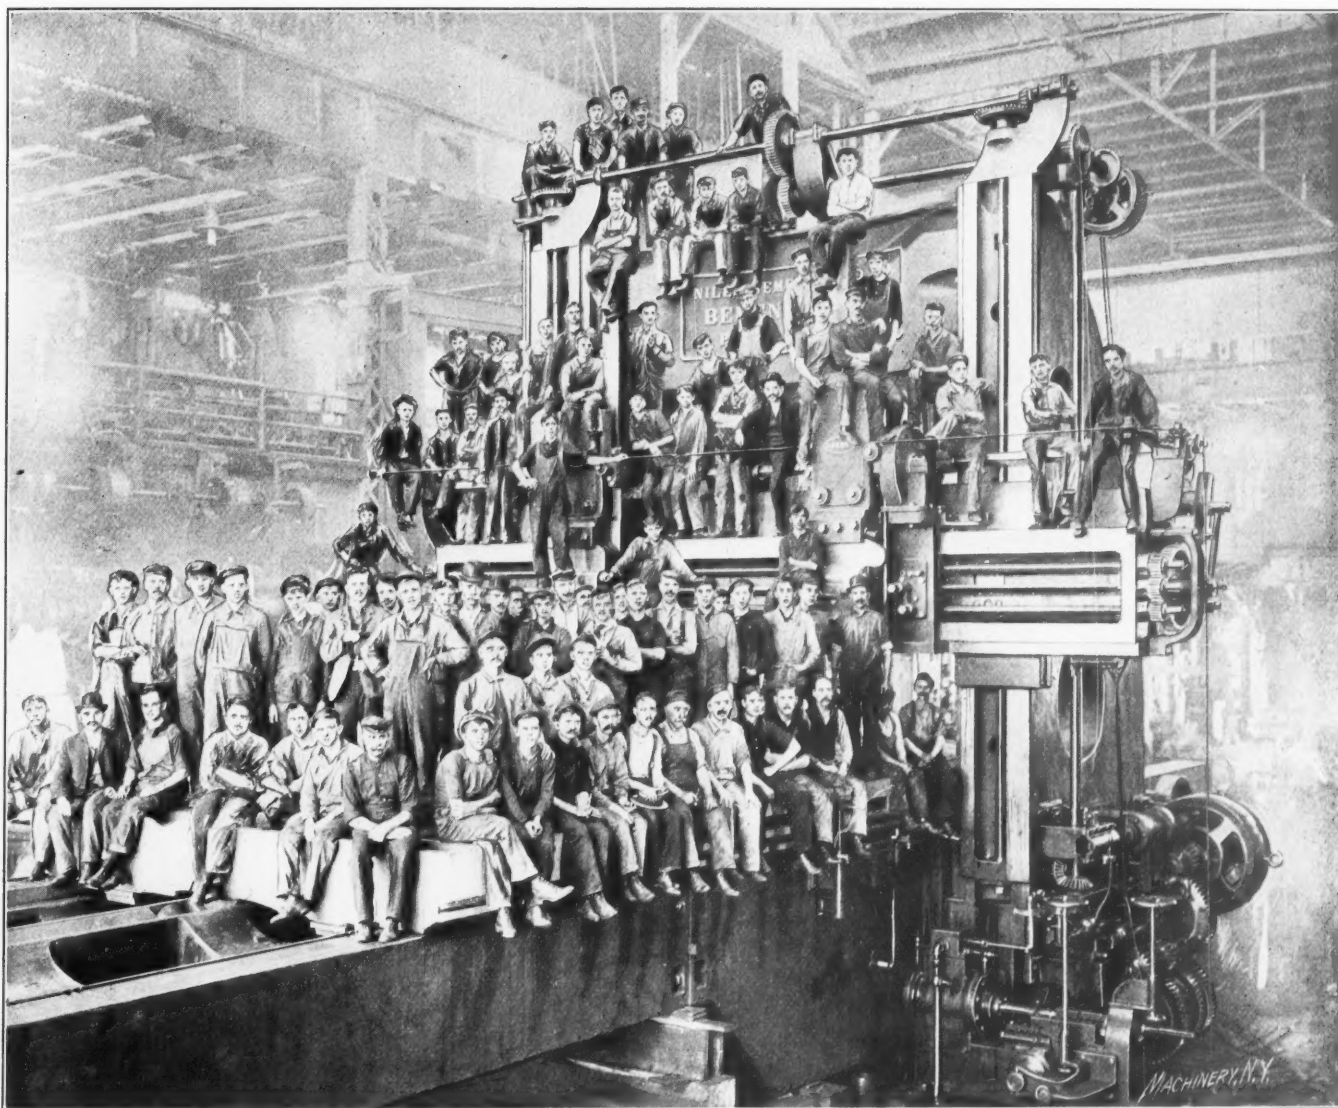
Gigantic 14-foot Planer built at the Bement-Miles Works of the Niles-Bement-Pond Co.
